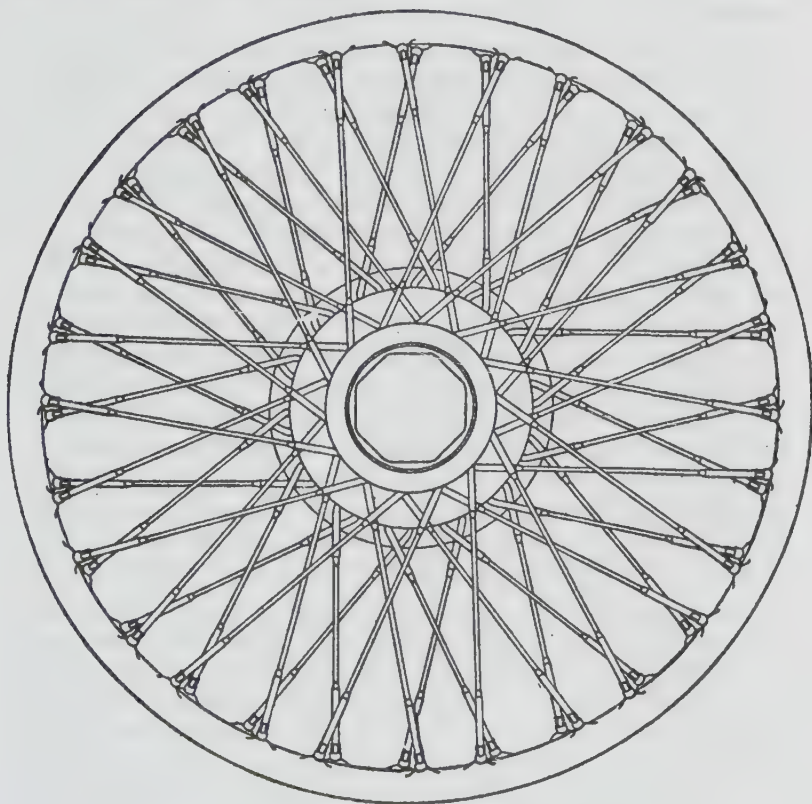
SIDE VIEW OF WIRE WHEEL.
